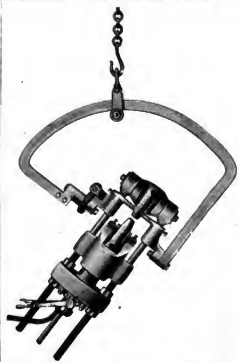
SUSPENDED RIVETING MACHINE—BOTTOM VIEW.
